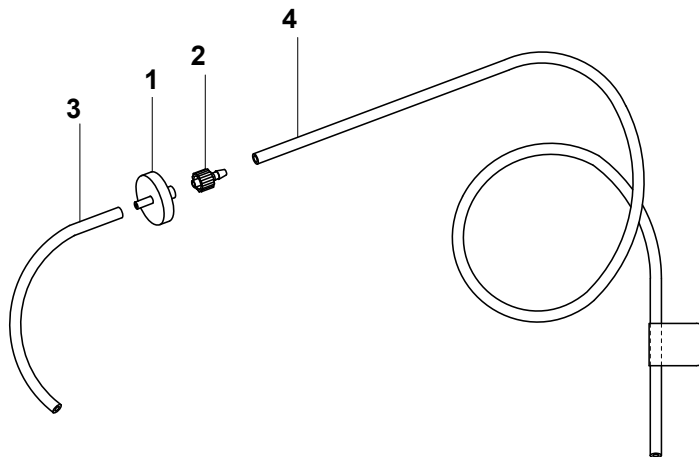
Setting Up the M1655B Gas Exhaust Return Line
